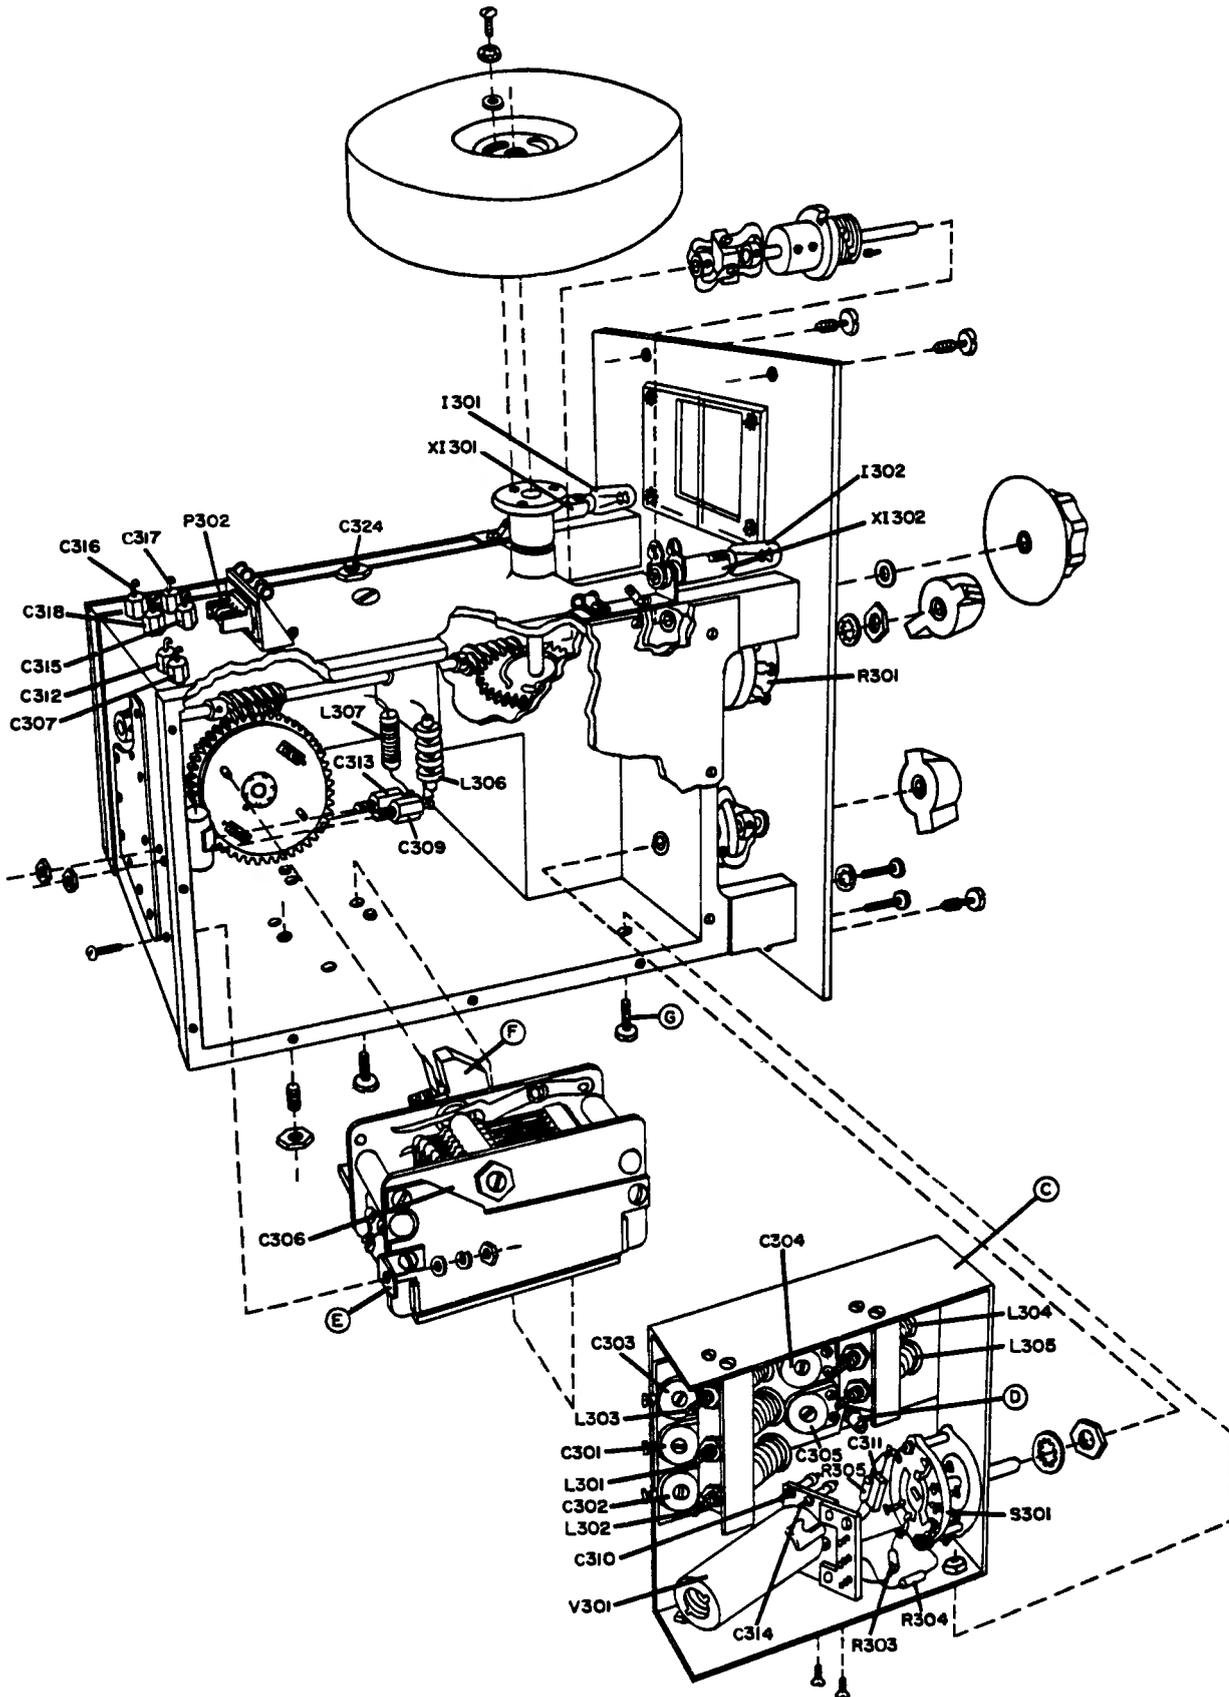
Signal Generator SG-32/TRM-1, Exploded View, Left Side
